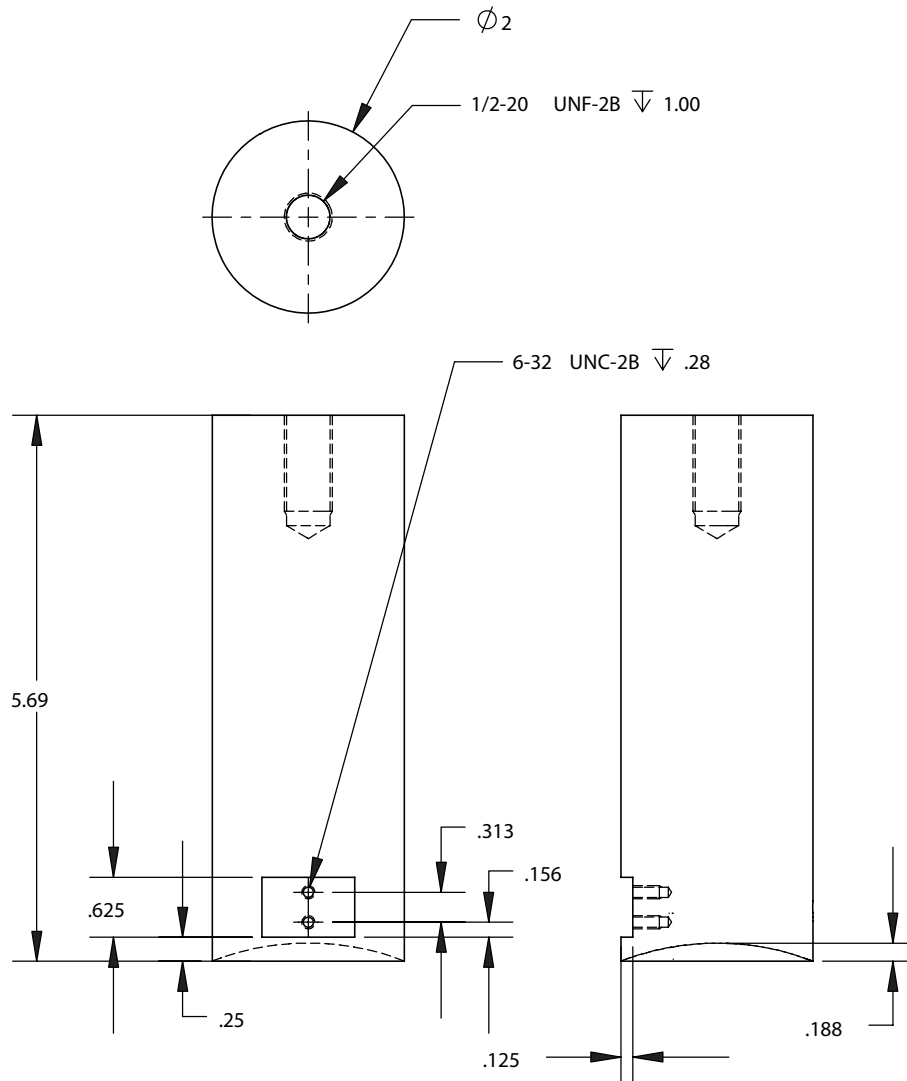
Drawing of the second generation top platen connector used with the Sensotec load cell and threaded rod. Dimensions in inches unless otherwise noted.
